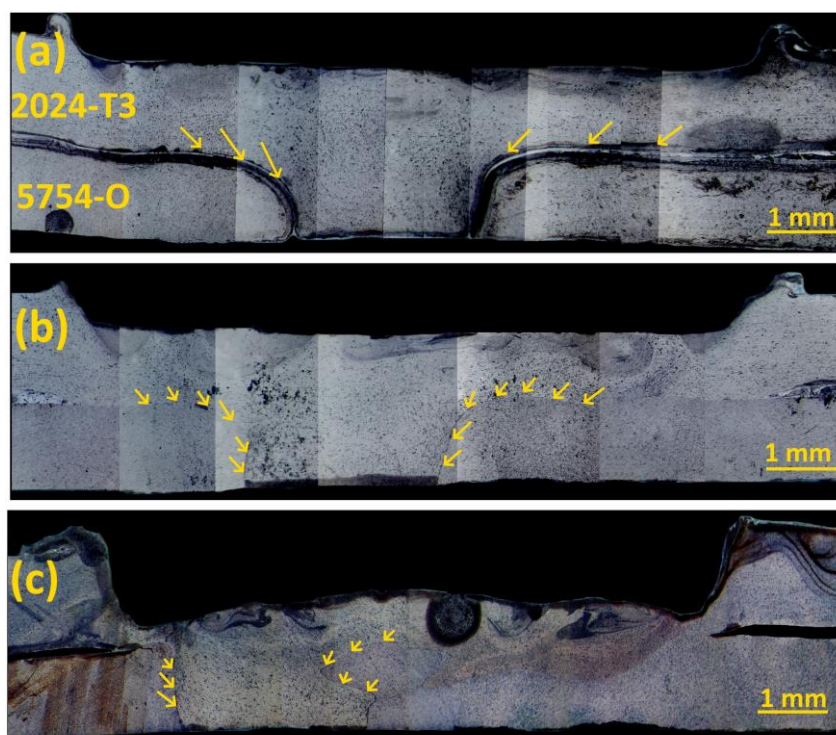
Macrographs of welds produced as function of tool penetration depth, (a) 0.25 mm, (b) 0.35 mm and (c) 0.45 mm.
